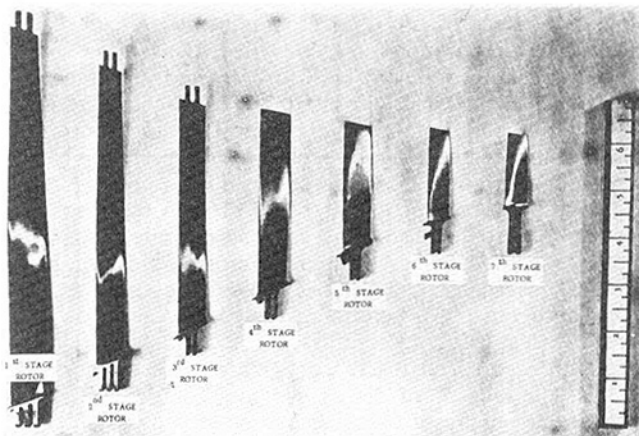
Curtiss-Wright TJ60 compressor rotor blades
